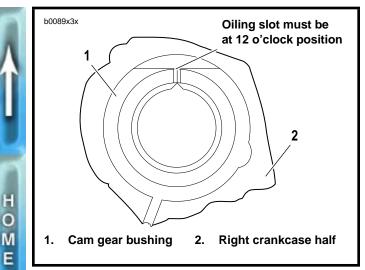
Cam Gear Bushing Installed in Crankcase
